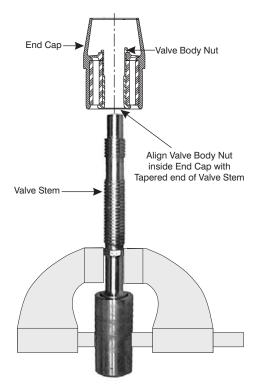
Align Valve Body Nut with the Tapered End of the Valve Stem.
